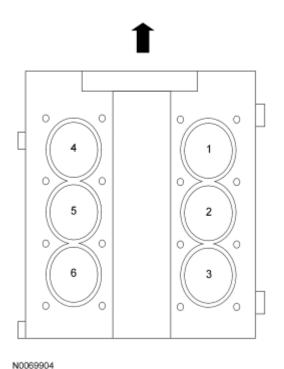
Engine Cylinder Identification Courtesy of FORD MOTOR CO.
